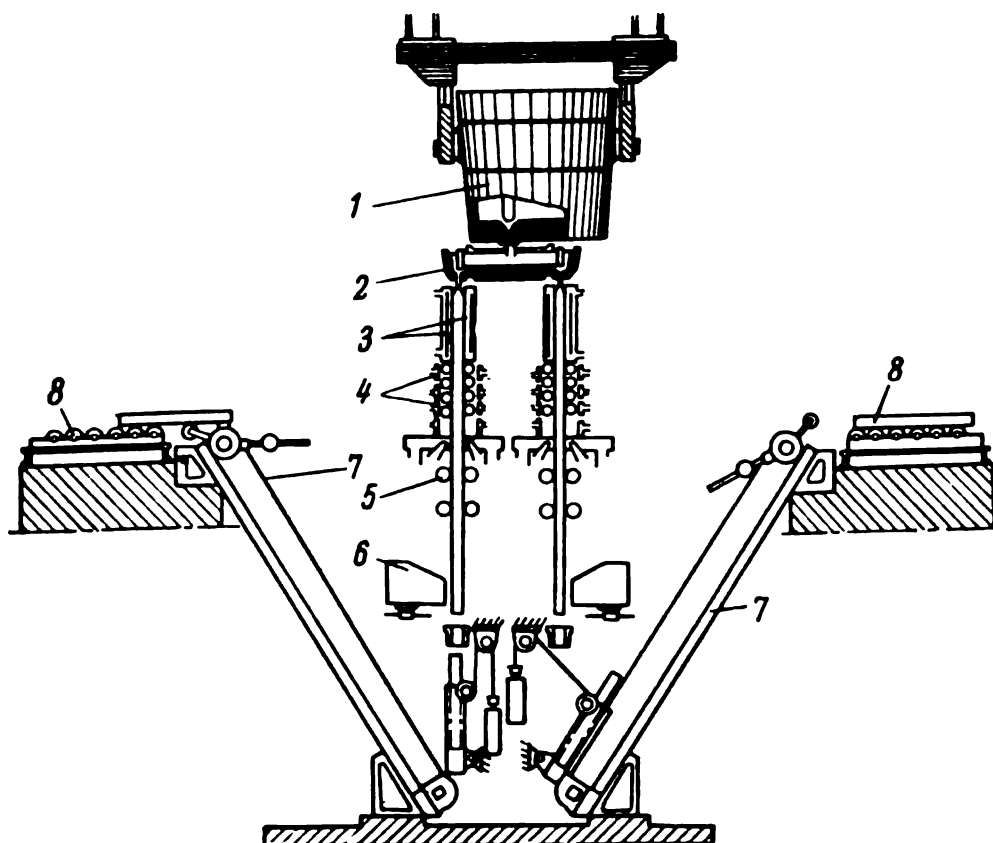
Principle of the continuous casting machine employed at the Krasnoye Sormovo Plant in the U.S.S.R.
